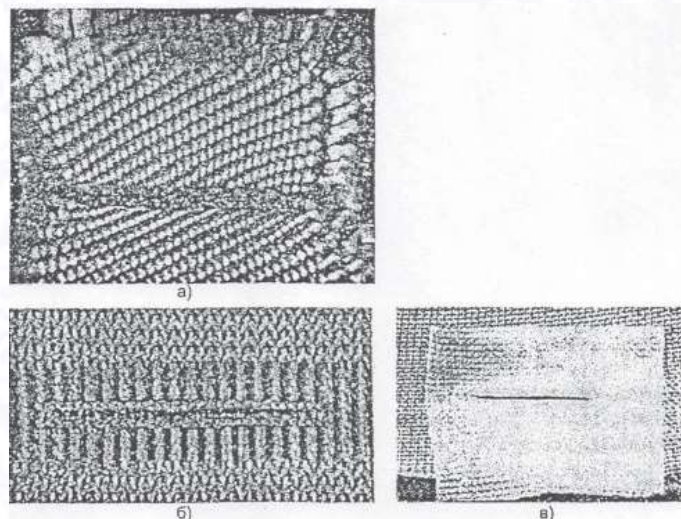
Welded joints of synthetic fabrics made with ultrasound: a) welded seam; b) welding of loops; c) process of ultrasonic cutting of fabrics.
